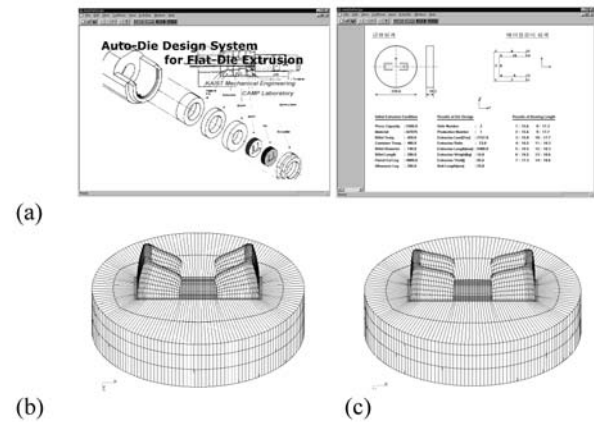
(a) Developed computer-aided design system for flat-die hot extrusion process and deformed shapes of the workpiece with (b) constant bearing lengths of 5mm and bearing length designed from this system (c)
